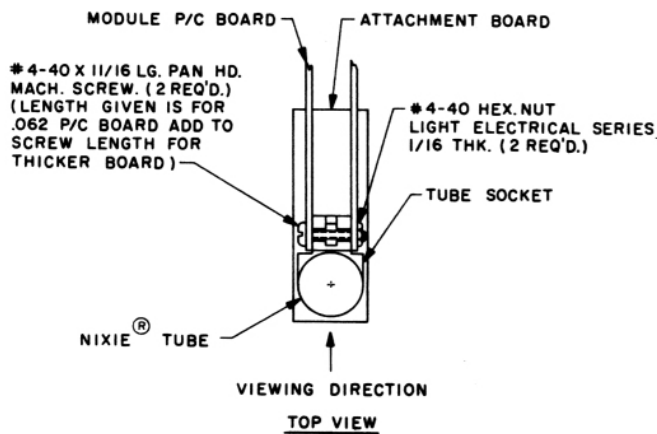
DRIVER MODULE BOARD DUAL RIGHT AND LEFT SIDE MOUNTING 0.800" MIN. CENTER-TO-CENTER
